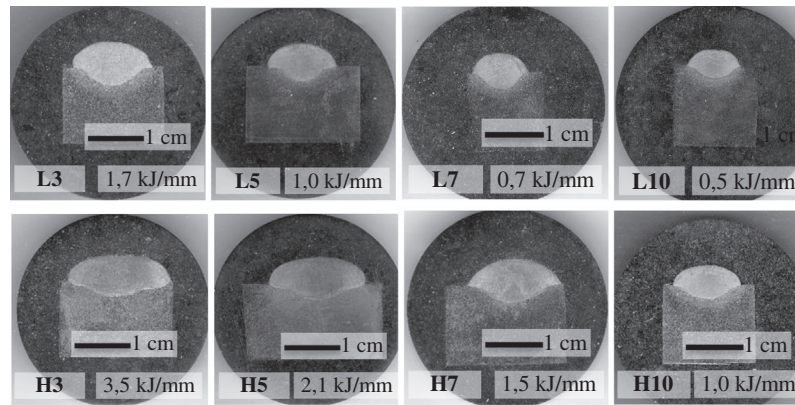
Macrostructure of the welded test pieces without shielding gas.
